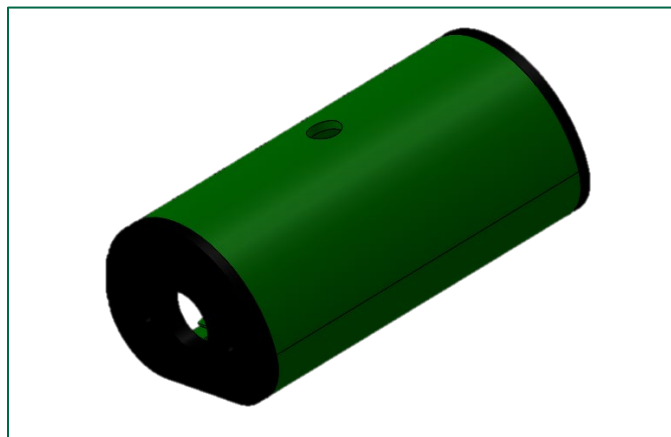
Render of rover body, with vacuum and motor shaft openings visible.
